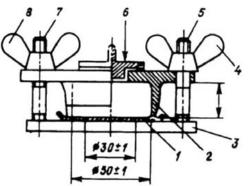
1 - test specimen; 2 - cylindrical chamber; 3 - base plate with a hole of 30 mm diameter; 4, 8 - wing nuts; 5, 7 - bolts; 6 - plug.
